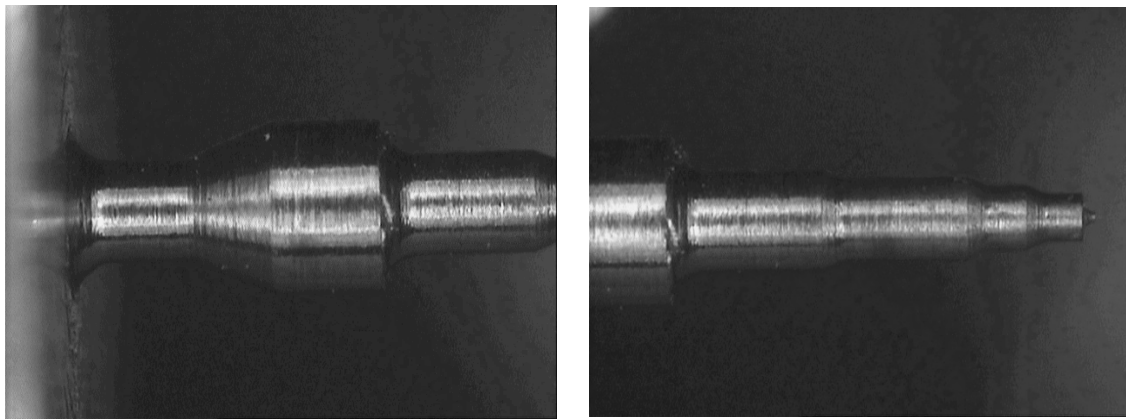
A part produce using Disk-2 cut tool path for taper cutting.
